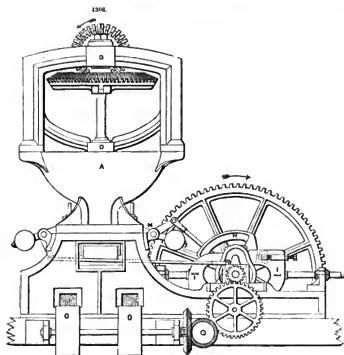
is a front elevation, and Fig. 1307 a plan; Fig. 1308 is a vertical transverse section enlarged; Fig. 1309 a plan of the screw; and Fig. 1310 is a longitudinal section of the machine.
